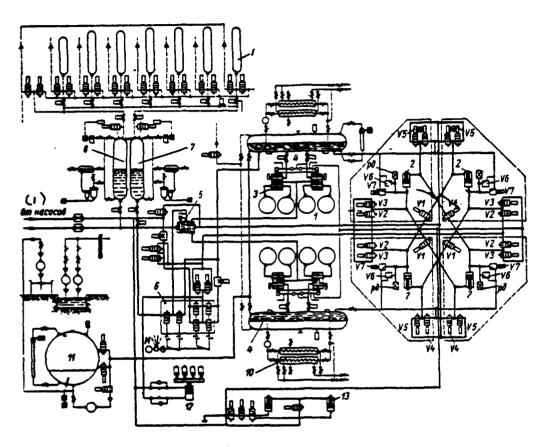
The hydraulic schematic of stamping machine by effort/force 31500 t: 1 - master cylinders; 2 - recurrent and compensating cylinders; 3 - filler valves; 4 - filler tank; 5 - main bleeder; 6 - control valves; 7 - water bottles of pull-backs; 8 - water bottles of master cylinders; 9 - compressed air tanks; 10 - water cooler; 11 - receiver tank; 12 - servocontrol by filler valves; 13 - knockouts; V1 - valves for double-t joint of pull-backs; V2 - pressure valves of pull-backs; V3 - support valves; V4 - drain valves (from the upper
